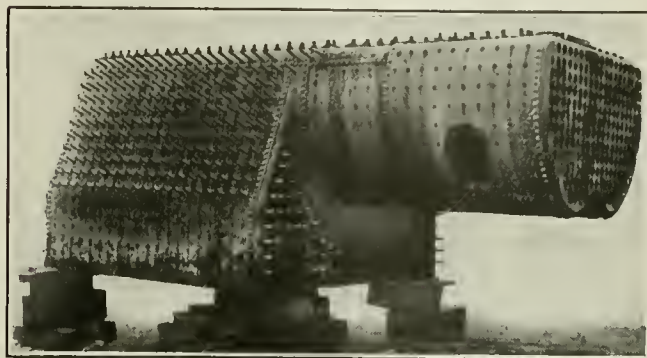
SHOWING STAY-BOLTS AND TUBE SPACING
